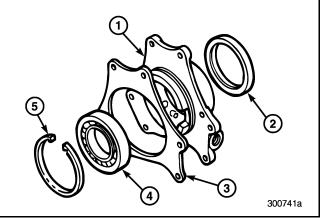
Exploded View of Rear Mainshaft Bearing Cover
